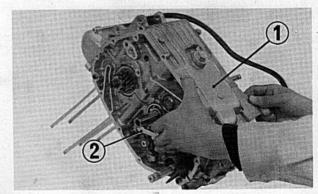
(1) Lower crankcase (2) Gearshift arm
